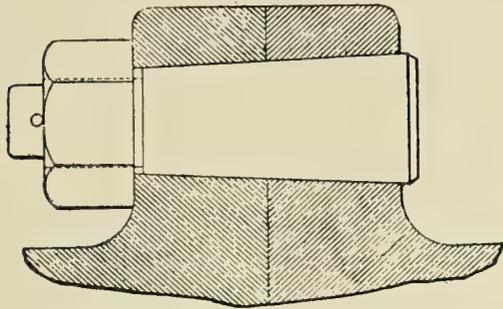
DETAIL OF FLANGE COUPLING AND BOLT
